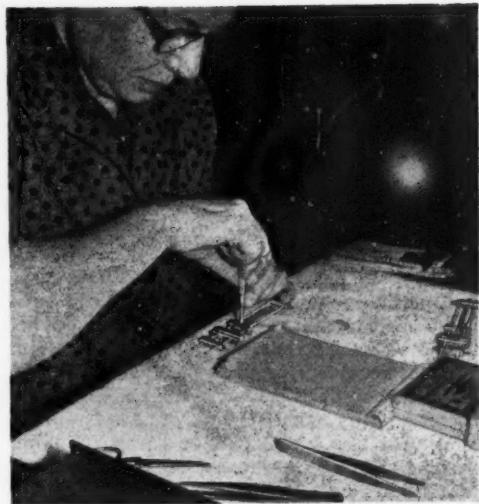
Here, one of the Highly-skilled Operators is Seen Twisting the Strip Used in Mikrokator Movements, with the Aid of a Small Fixture
